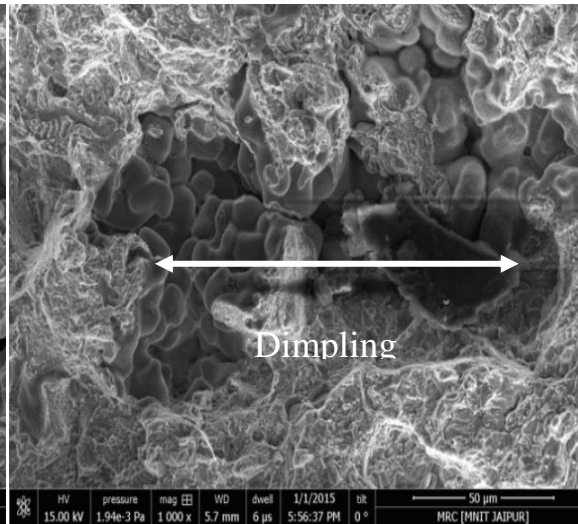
SEM fractographs for 7.5 wt.-% of MD particulate filled ZA-27 alloy composites after fracture test
